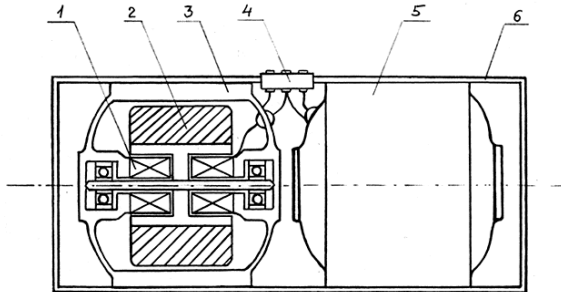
Design of the container being weighed comprising electrical windings 1 of the stator of an asynchronous gyroscope motor, massive cylindrical rotor part 2, housing of the first gyroscope 3, terminals of the gyroscope motor supply unit 4, housing of the second gyroscope 5 (shown without sectional view), and housing of the container 6.
